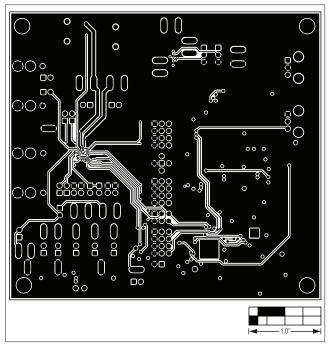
MAX9880A EV Kit PCB Layout—Layer 3
